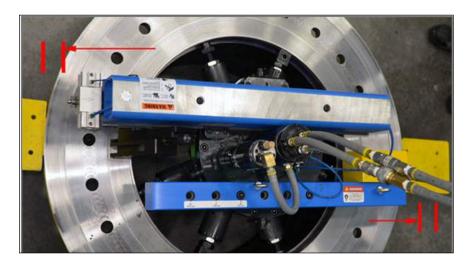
COUNTERWEIGHT AND MACHINING ARM AT EQUIDISTANCE
